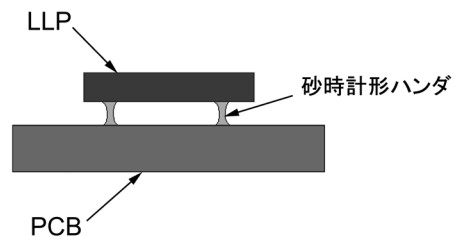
Pullback LLP Hour Glass Solder Joint
